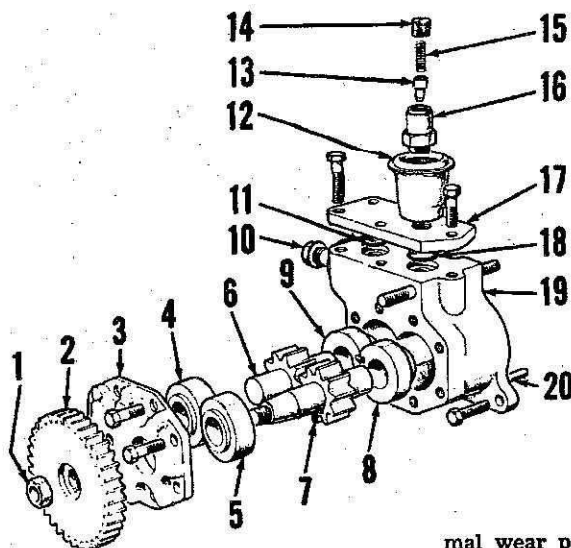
Exploded view of early type (Dowty) hydraulic pump assembly. Later relief valve for Dowty pump bolted directly to pump body instead of using separate mounting plate (17).
